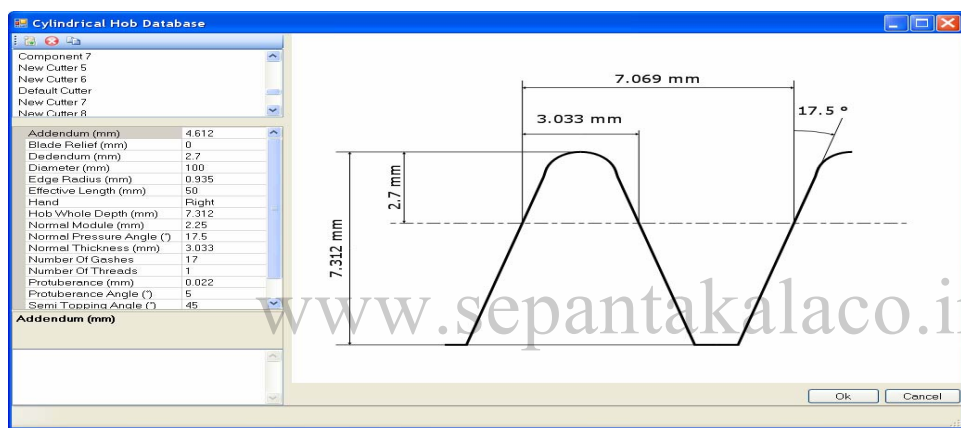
Original hobbing cutter for the wheel – full fillet tip
